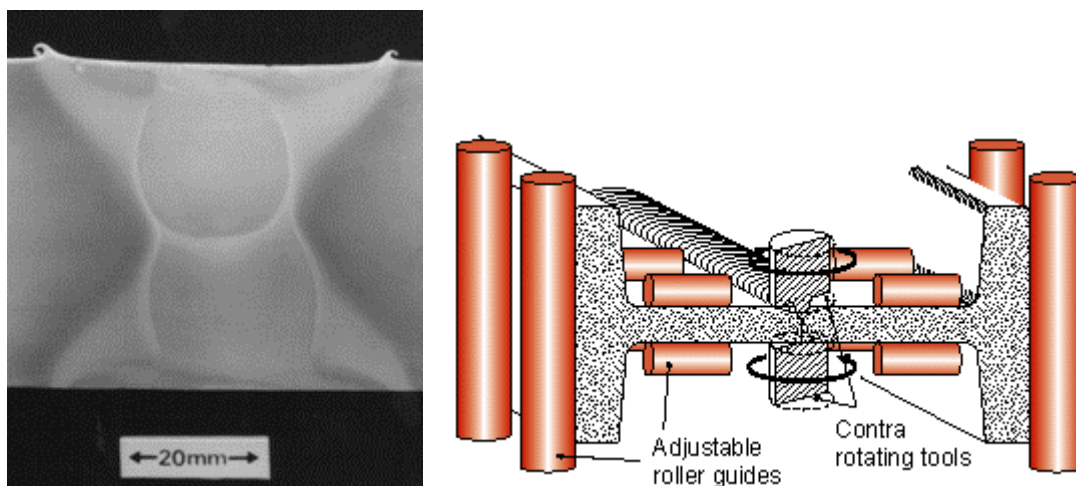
(left) Transverse microsection of FS welded AA6082-T6 50mm plate from both sides [36]. (right) illustration of double sided welding operation with contra rotating tools and roller fixtures [50].
